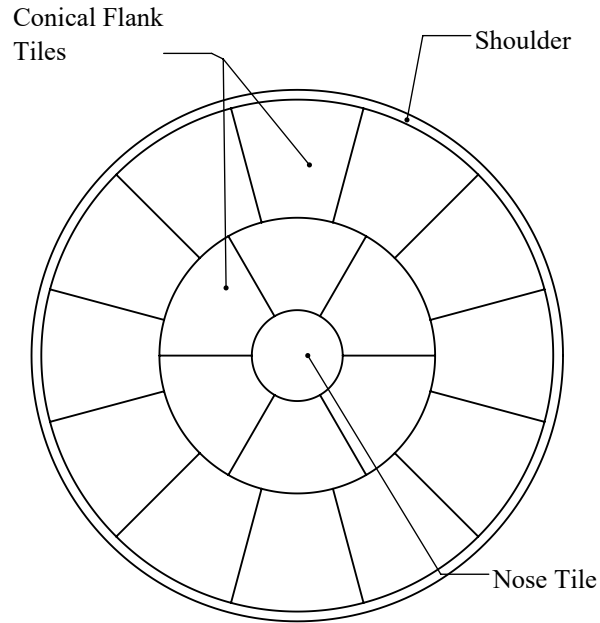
Front view of a symmetric tile layout with a single nose tile and two rings forming the conical flank.
